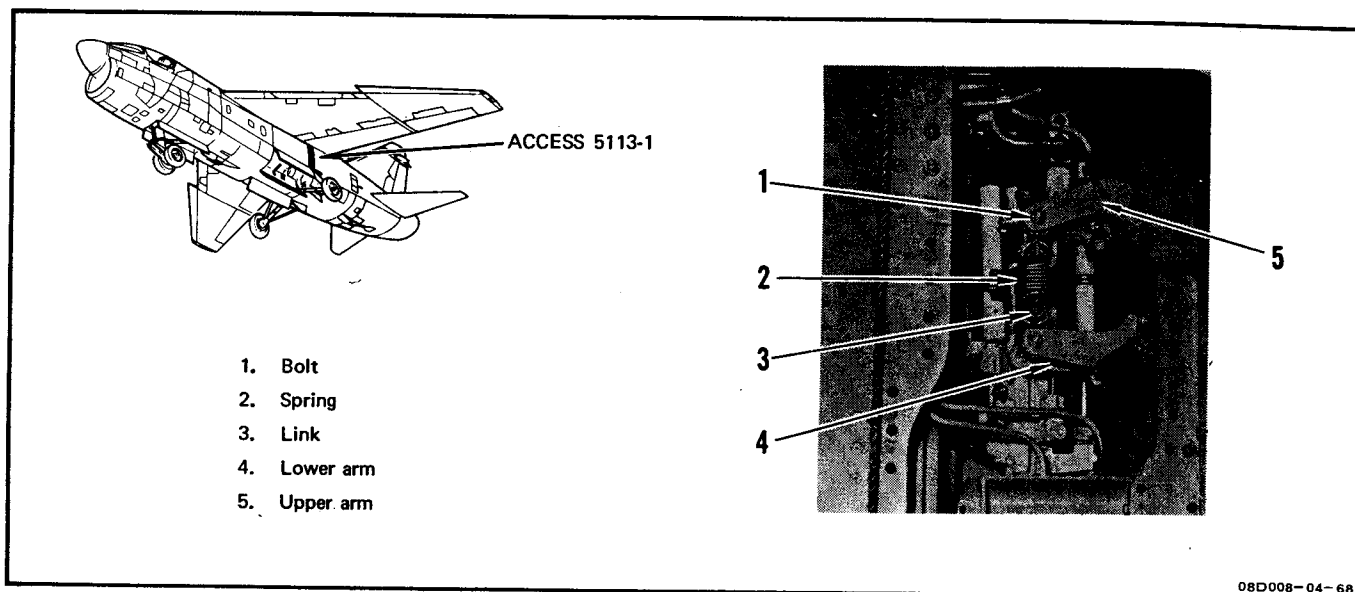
Roll Feel Spring and Arm Removal and Installation
